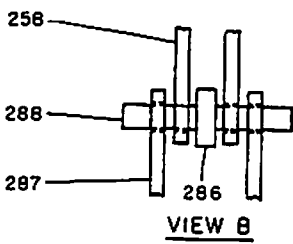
B Complete Spring Assembly (Ref. No. 273)
